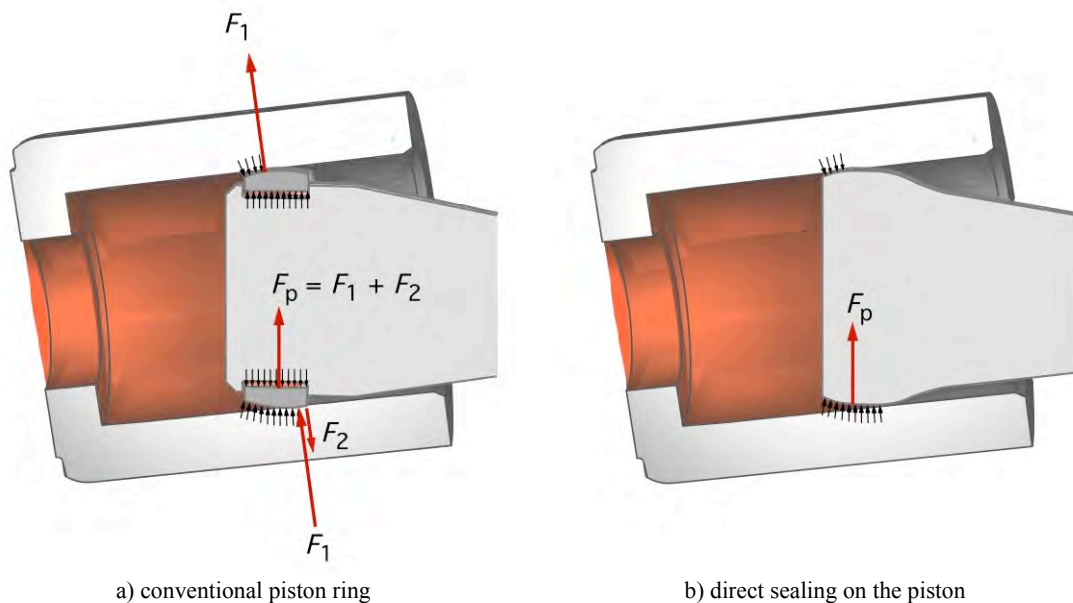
Sealing of the piston by means of a conventional piston ring or without a piston ring.
